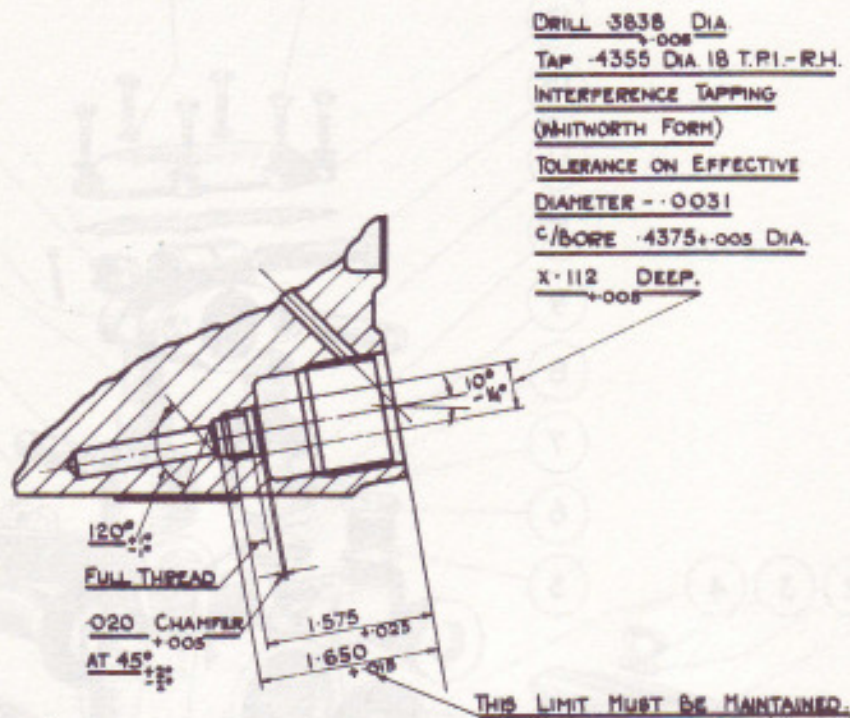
MODIFICATION TO MAIN CASING WHEN FITTING THE SCREWED-IN TYPE VALVE SEATS.
